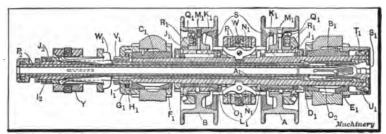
Section through Spindle, Boxes, Pulleys, etc., of the No. 00 Brown & Sharpe Automatic Screw Machine
